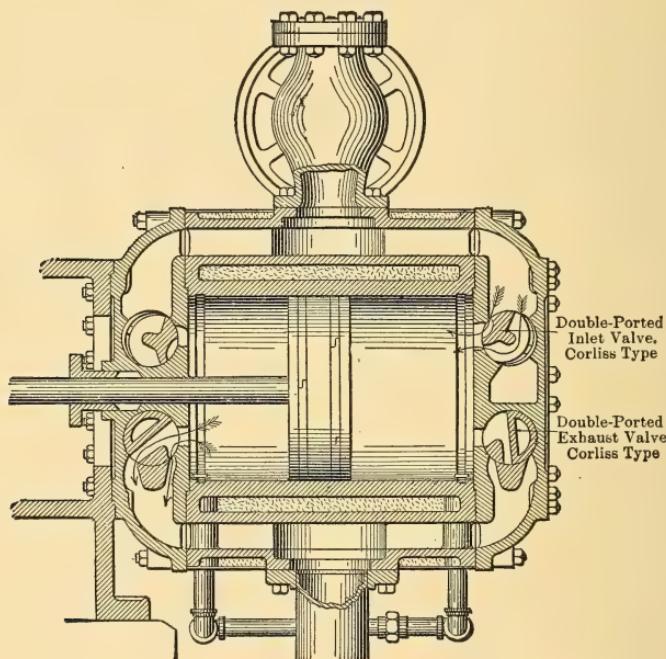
Non-detaching Corliss Valves Located in Cylinder Head.
